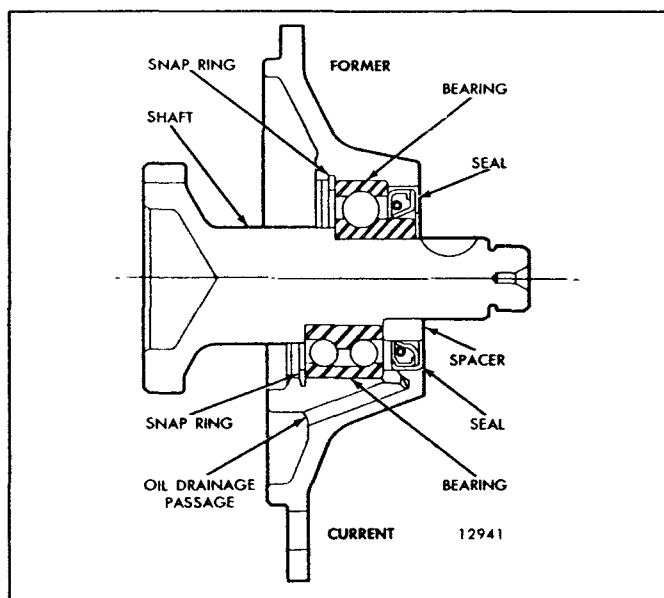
Former and Current Drive Plate Type Accessory Drive
